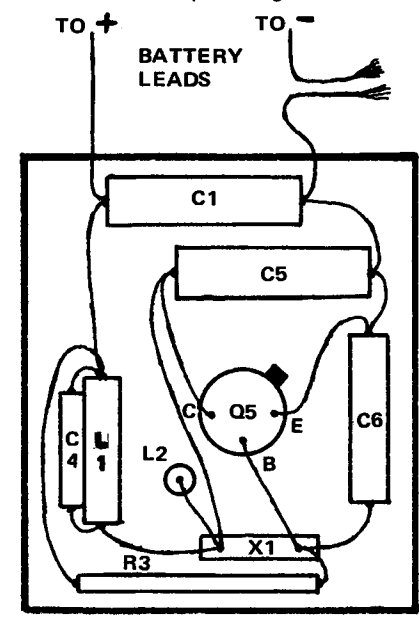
SUGGESTED PARTS WIRING (BOTTOM VIEW). The components are shown here for reference only. They are mounted on the top side of the board.
